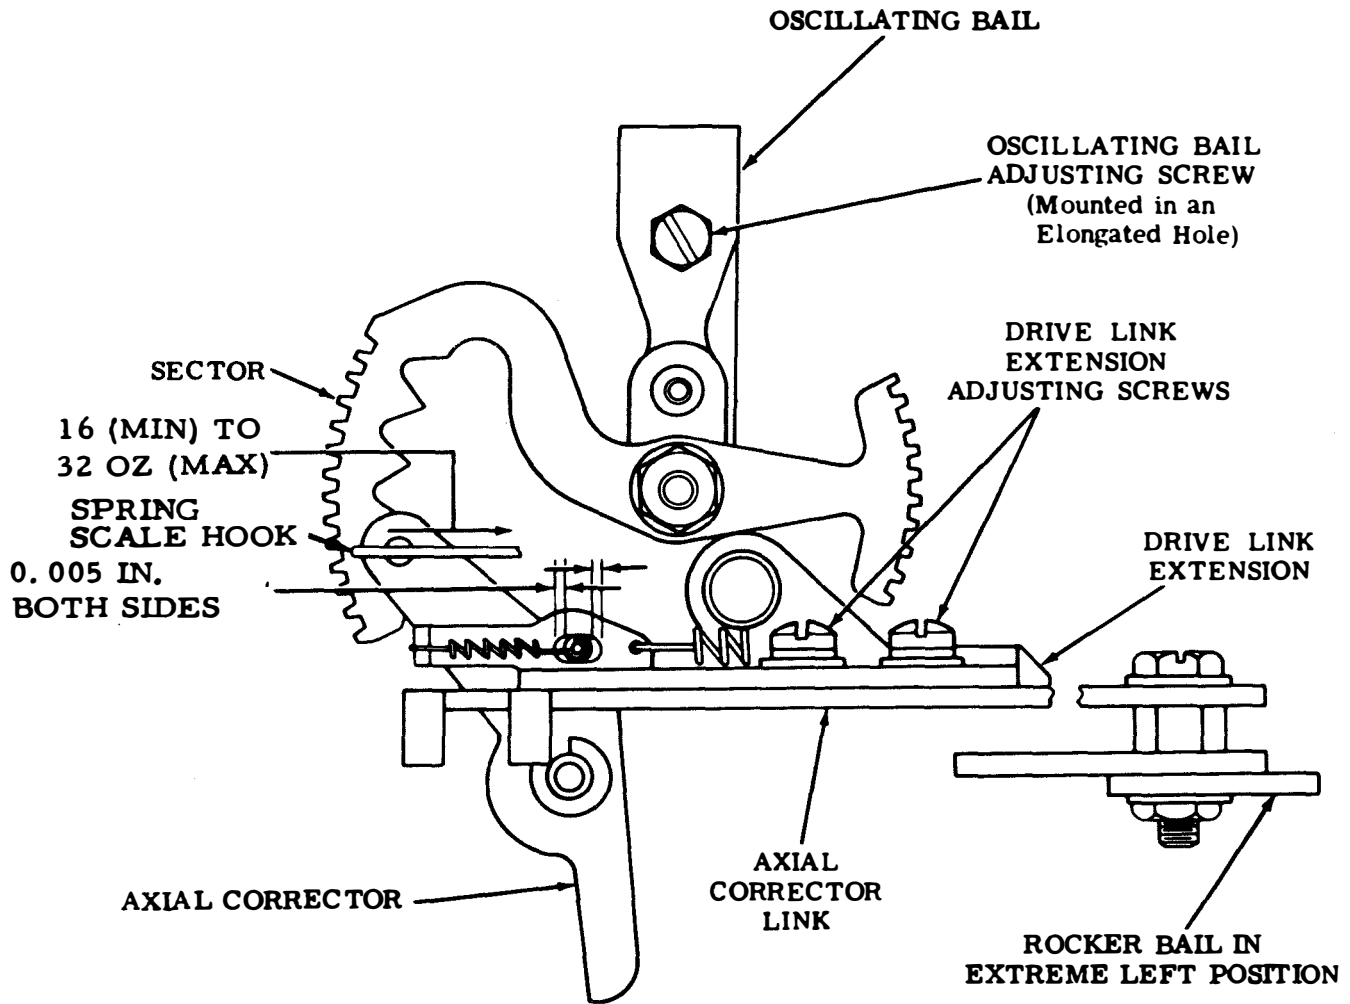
Corrector Drive Link Extension Spring and Axial Corrector (Yielding) - Top View
